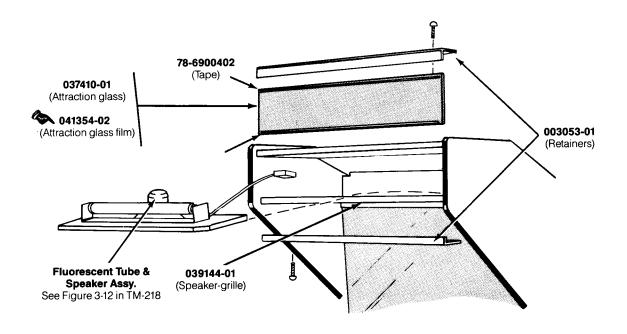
Fluorescent Tube and Speaker Board Parts List
